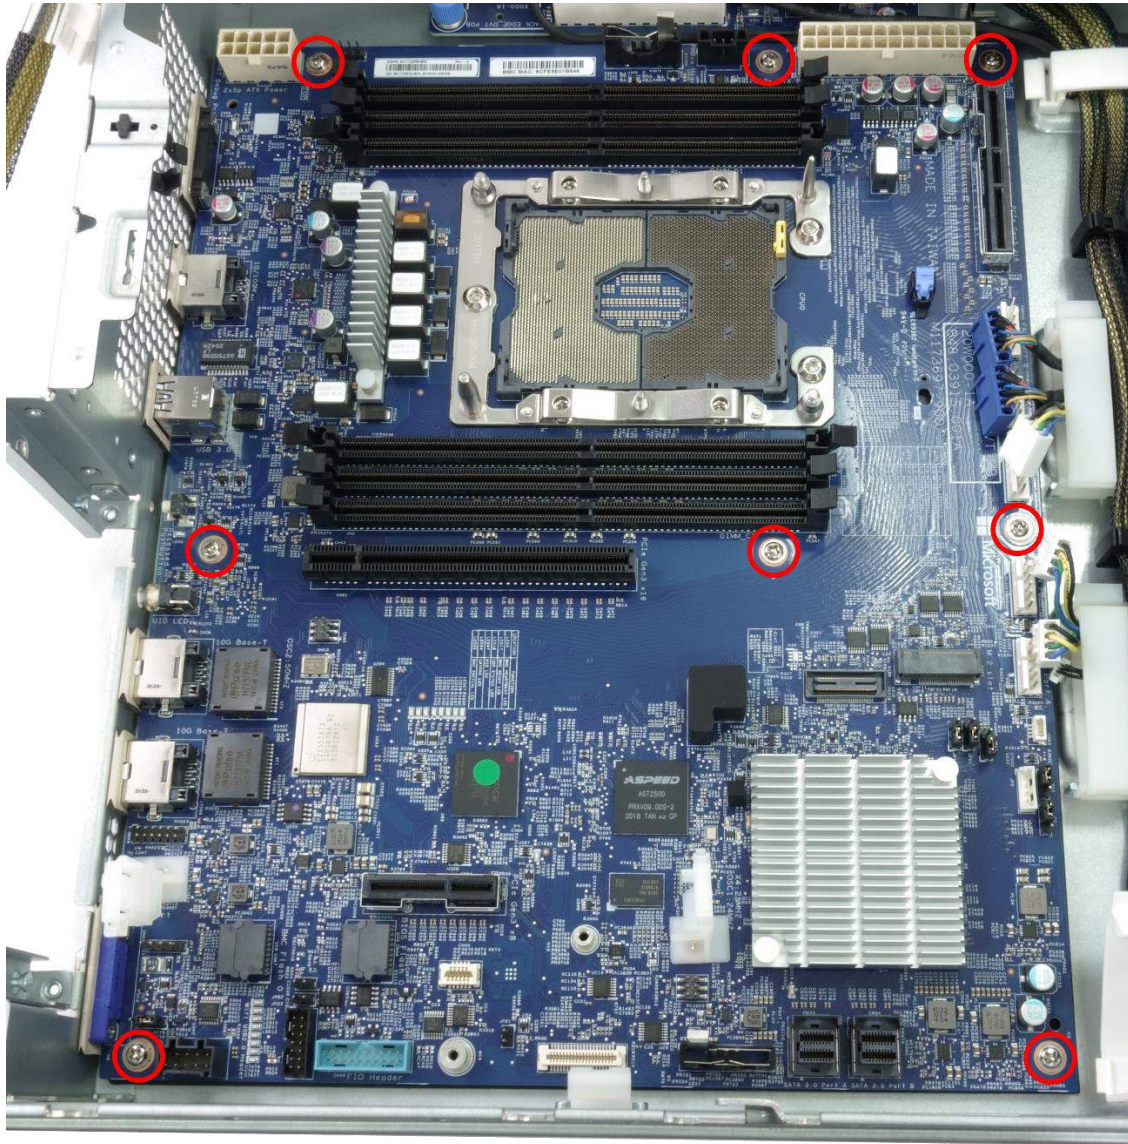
Lower Mainboard, Insert and Tighten Mainboard Screws.
